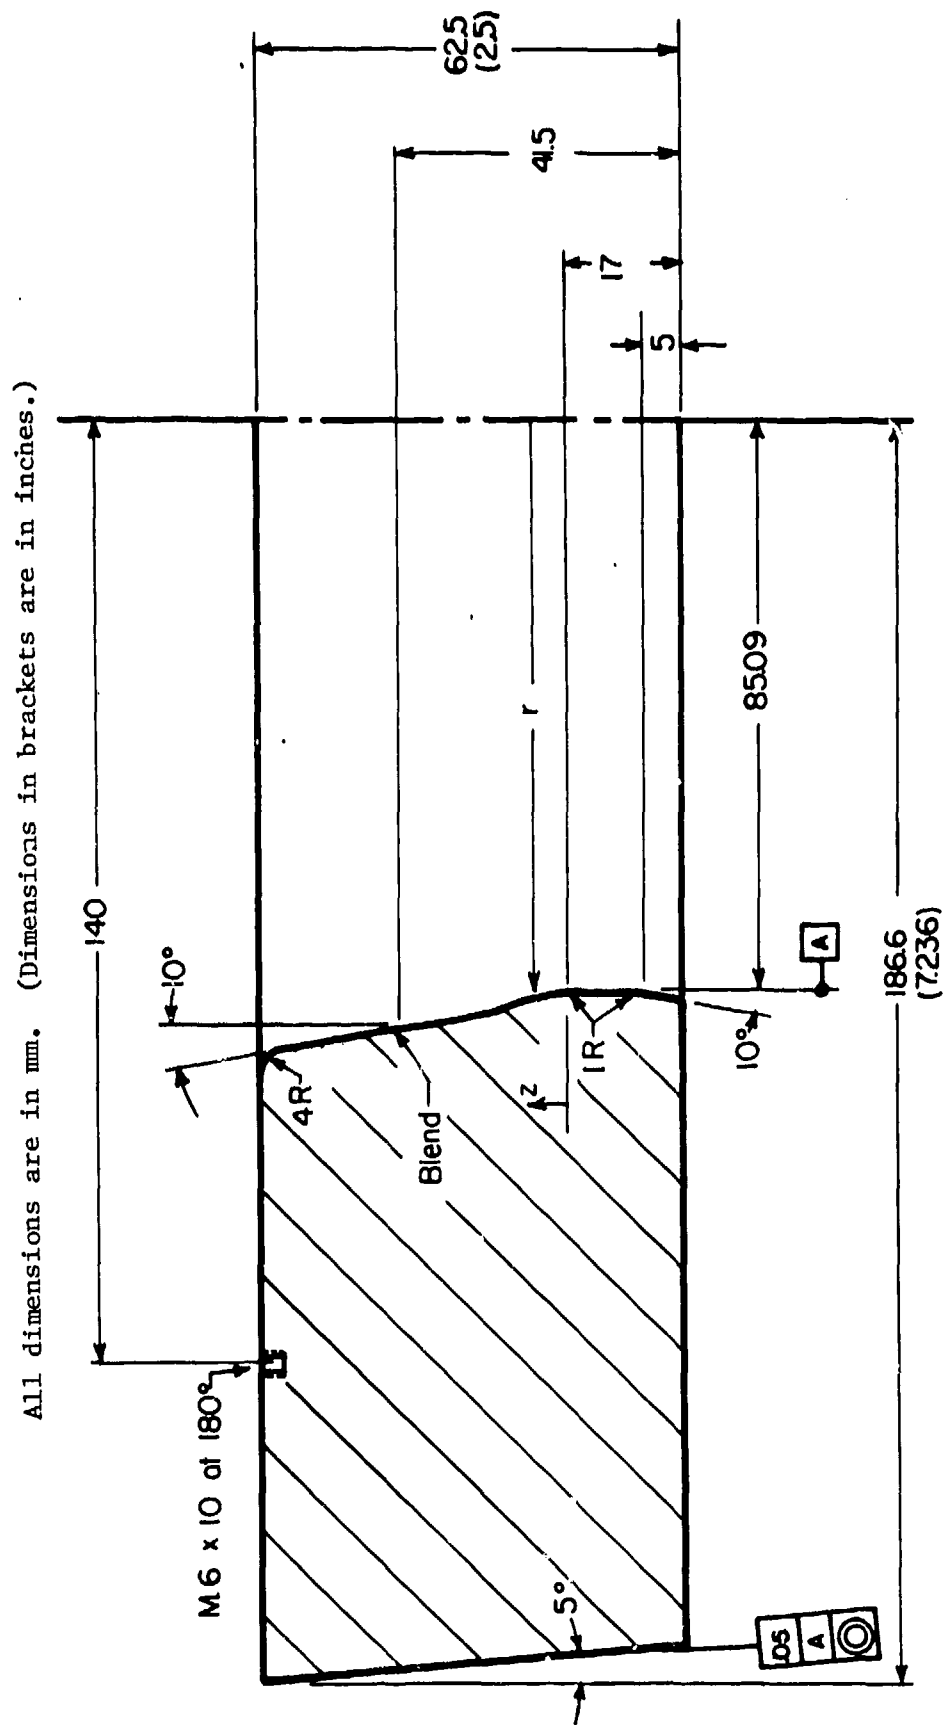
Polynomial die shape for hot drawing of M107 shell (first draw operation).
